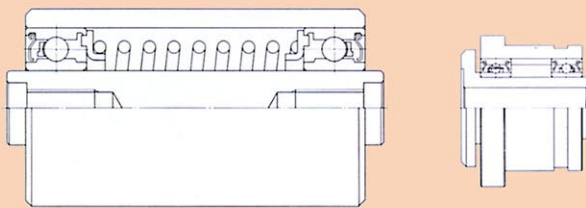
Shaft Press Fitted (with Complex Sleeve)
